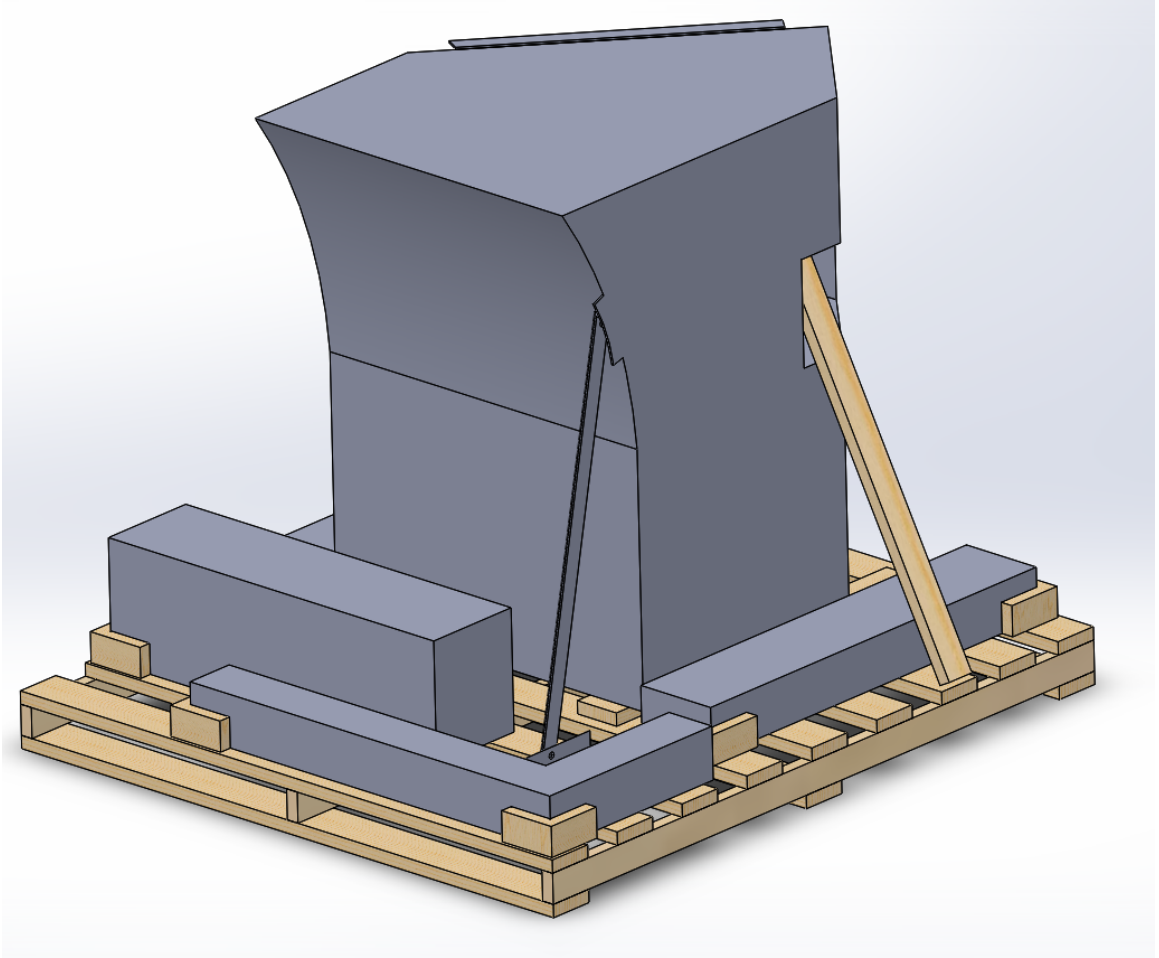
Right tank P-Module with minor objects placed on the same pallet
